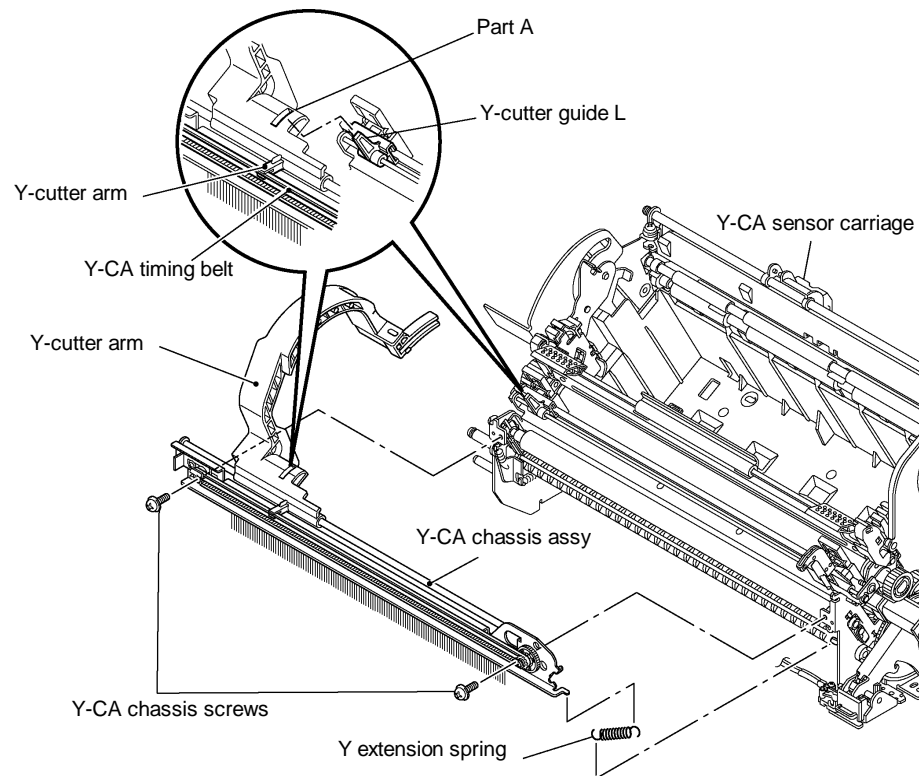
Installing the Y-CA Chassis Assy 2
